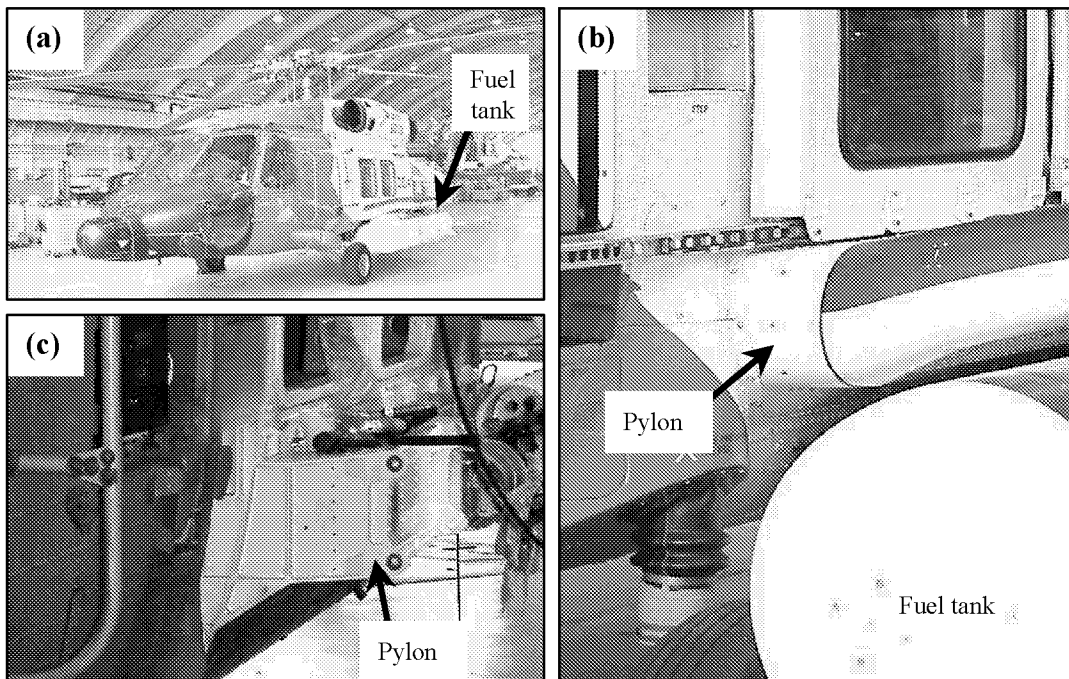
Photographs are shown of the external pylon-mounted fuel-tank assembly on the HH-60 helicopter. (a) A 120-gallon fuel tank is shown on the fuselage. (b) A more detailed photograph of the fuel-tank pylon attachment is shown. (c) A pylon is seen after the fuel-tank assembly was removed for inspection.
